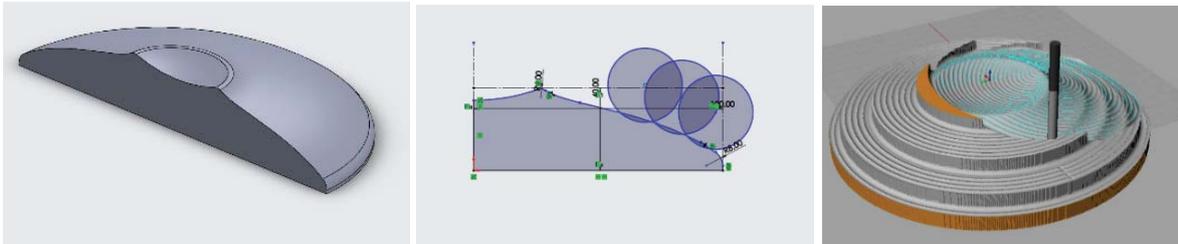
CAD modelling and CAM sequence prepared for the Dip-Casting form.
